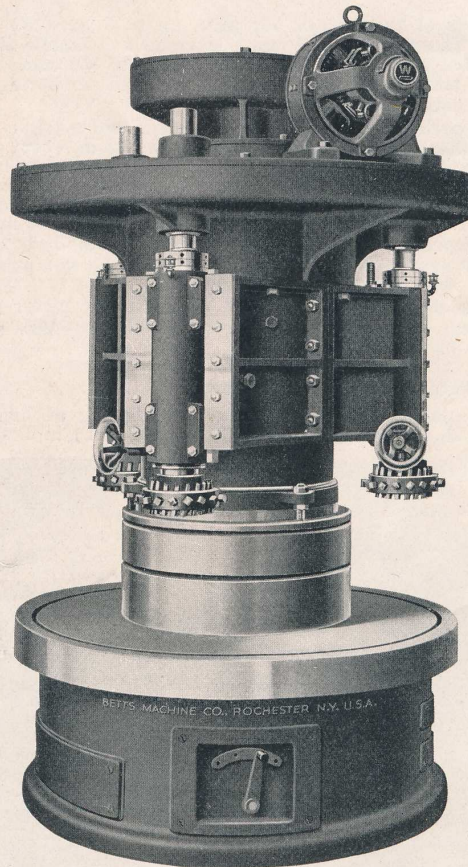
BETTS HEAVY DUTY VERTICAL CONTINUOUS MILLING MACHINE, TYPE A8100
